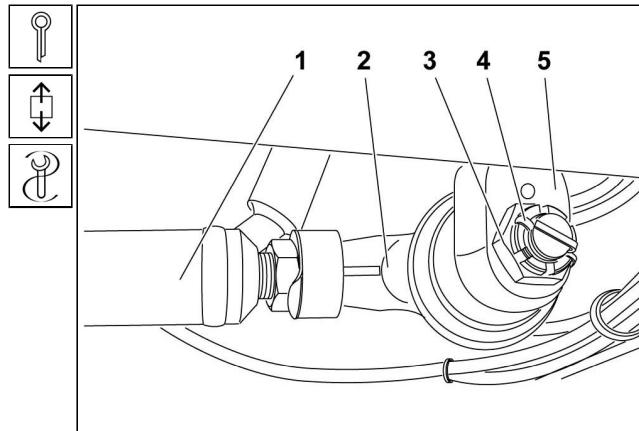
Connection of power cylinder pull rod c/w steering arm - removal
